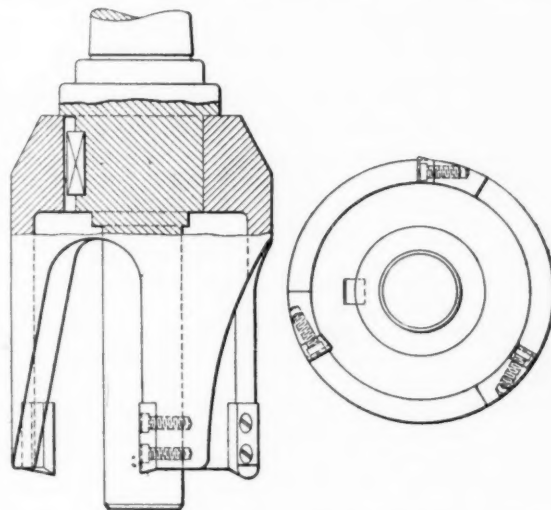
TREPPANNING TOOL SUITABLE FOR 7-IN.-DIAMETER HOLES IN 5-IN.-THICK STEEL
